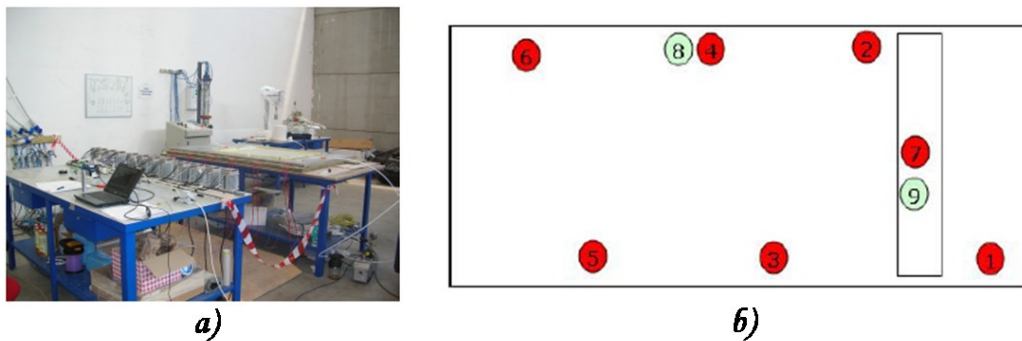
9: Tool control system. a) A series of electrical resistances control the temperature, b) Thermocouples “J” monitor the tool temperature during the infusion process.
